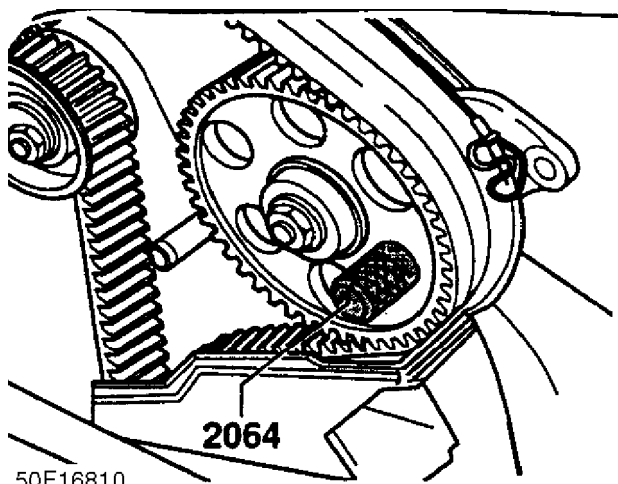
Locking Injection Pump Sprocket (Lock Pin 2064)
